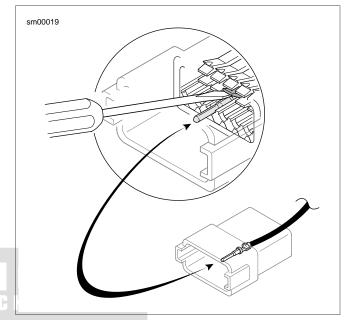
Deutsch DT Sealed Connector: Press Terminal Latch and Back Out Pin
